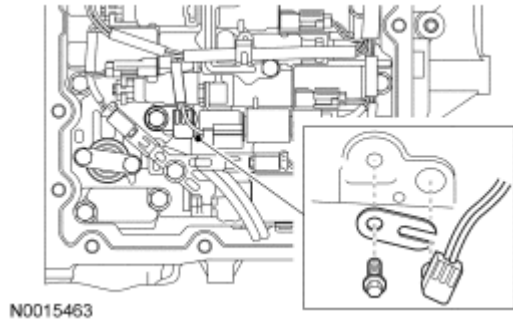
Identifying Transmission Fluid Temperature Sensor, Bolt & Lock Plate
